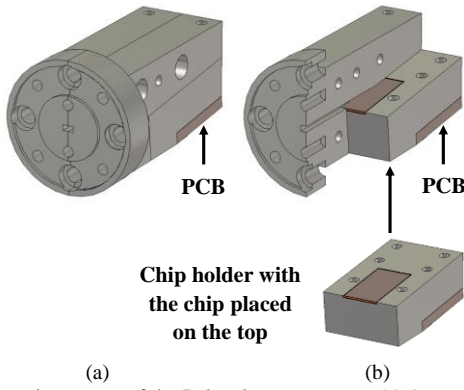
External structure of the D-band power sensor. (a) Assembled device. (b) Left half of the flange and waveguide with the chip holder attached. The flange is a standard UG387/U flange with WR 6.5 waveguide.
